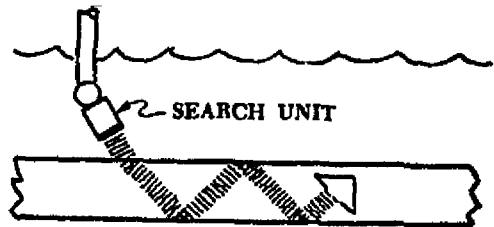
Immersed angle-beam technique (plate or sheet).
